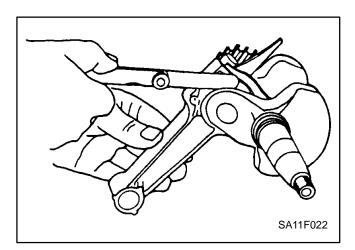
SIDE CLEARANCE OF CONNECTING ROD ON CRANK PIN
